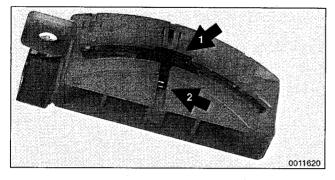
Align contact slide (1) with slot in switch housing (2) before installing gear position/neutral safety switch.
